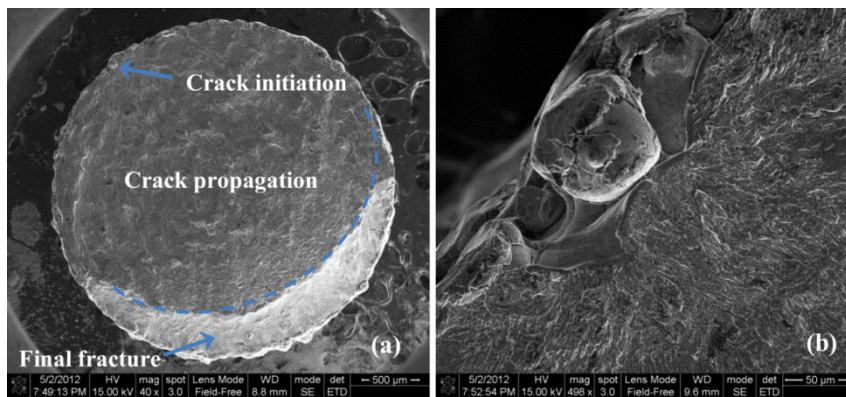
Fracture surface of Ti-6Al-4V fatigue specimen fabricated by LPBF. At high magnification (b) it can be noticed that the crack initiated from surface defect [366].
